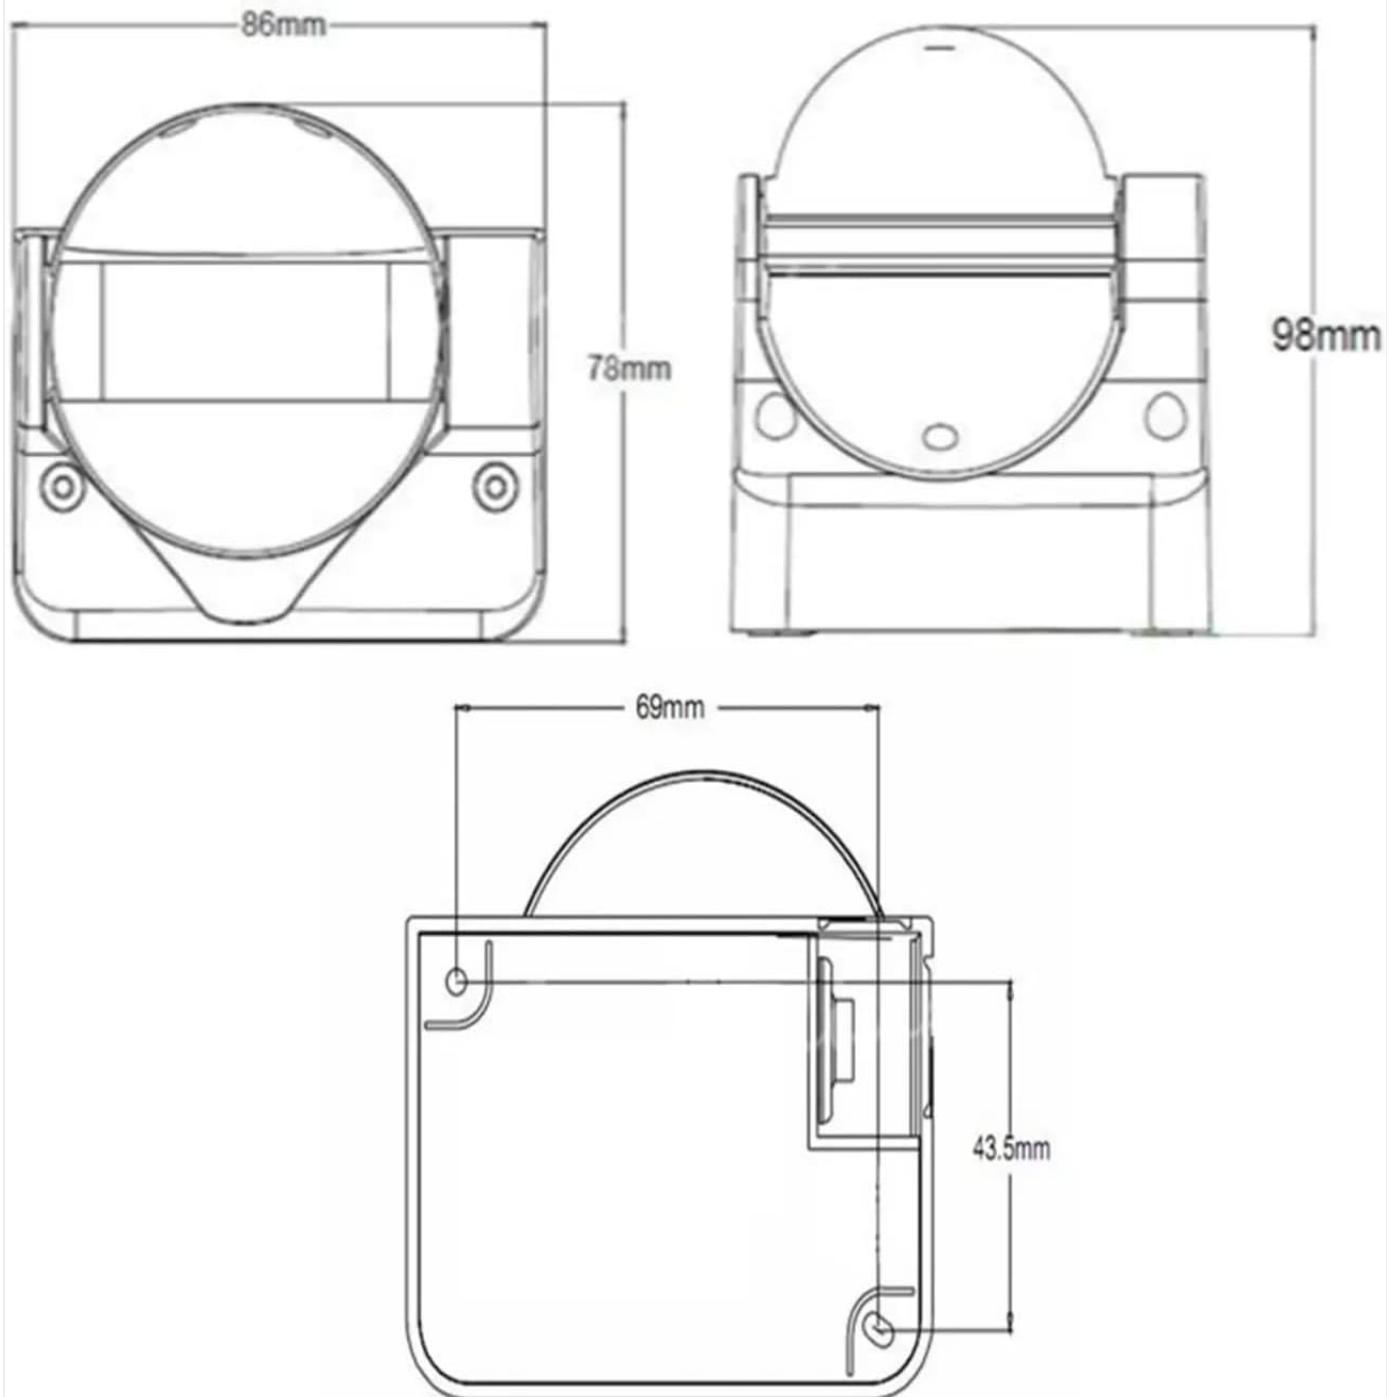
Technical drawing showing the dimensions of the Greluma PIR Motion Sensor (86mm, 78mm, 98mm, 69mm, 43.5mm).
